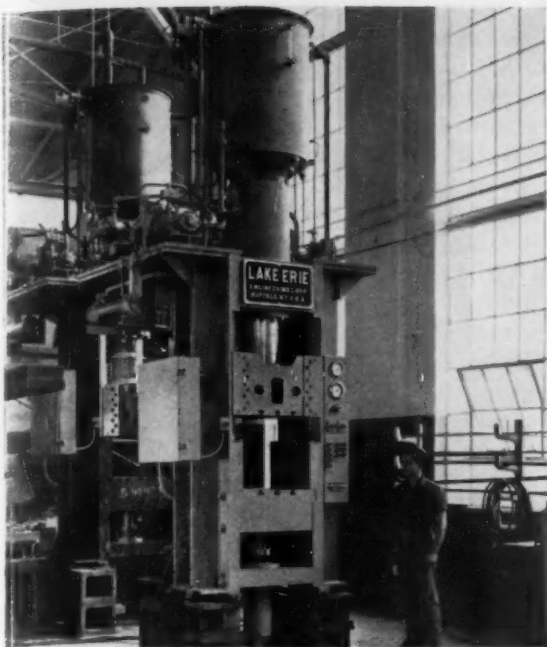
Automatic adjustment mechanism helps control depth of fill, improve part density.
